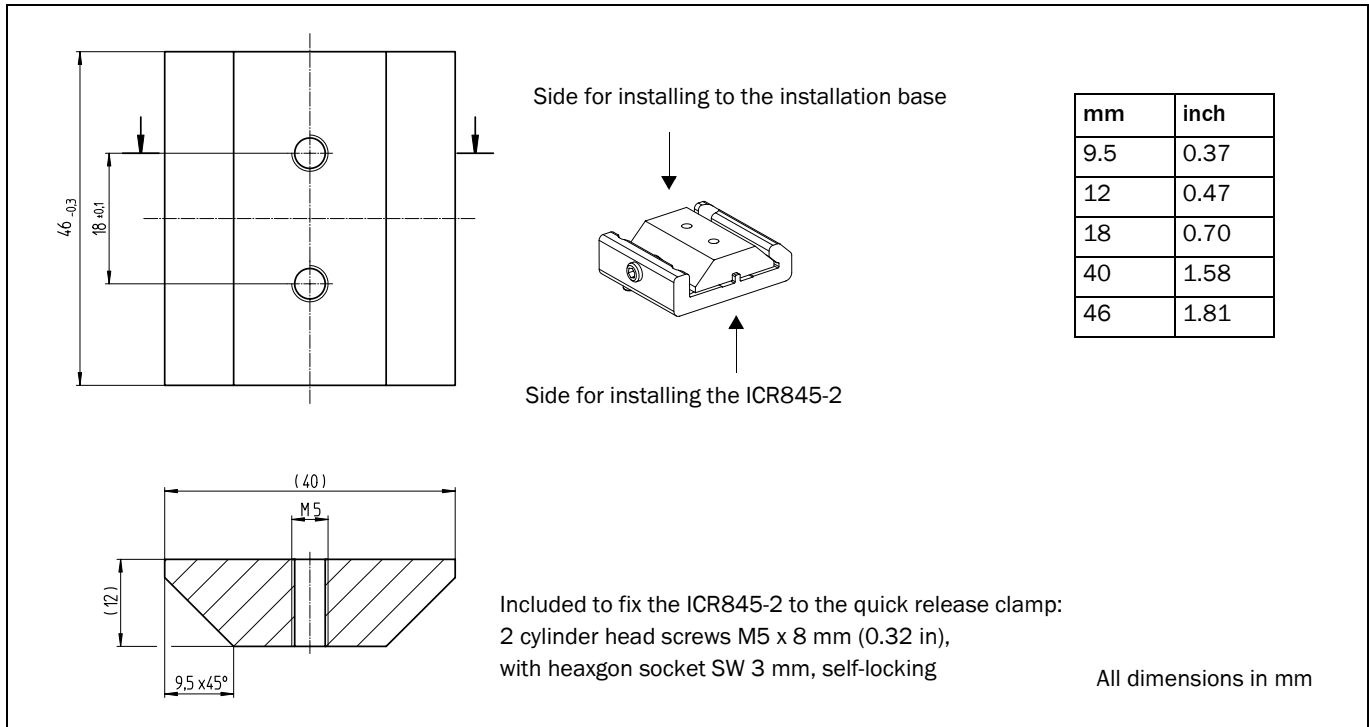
Dimensions of the clamping section for the quick release clamp no. 2042484
